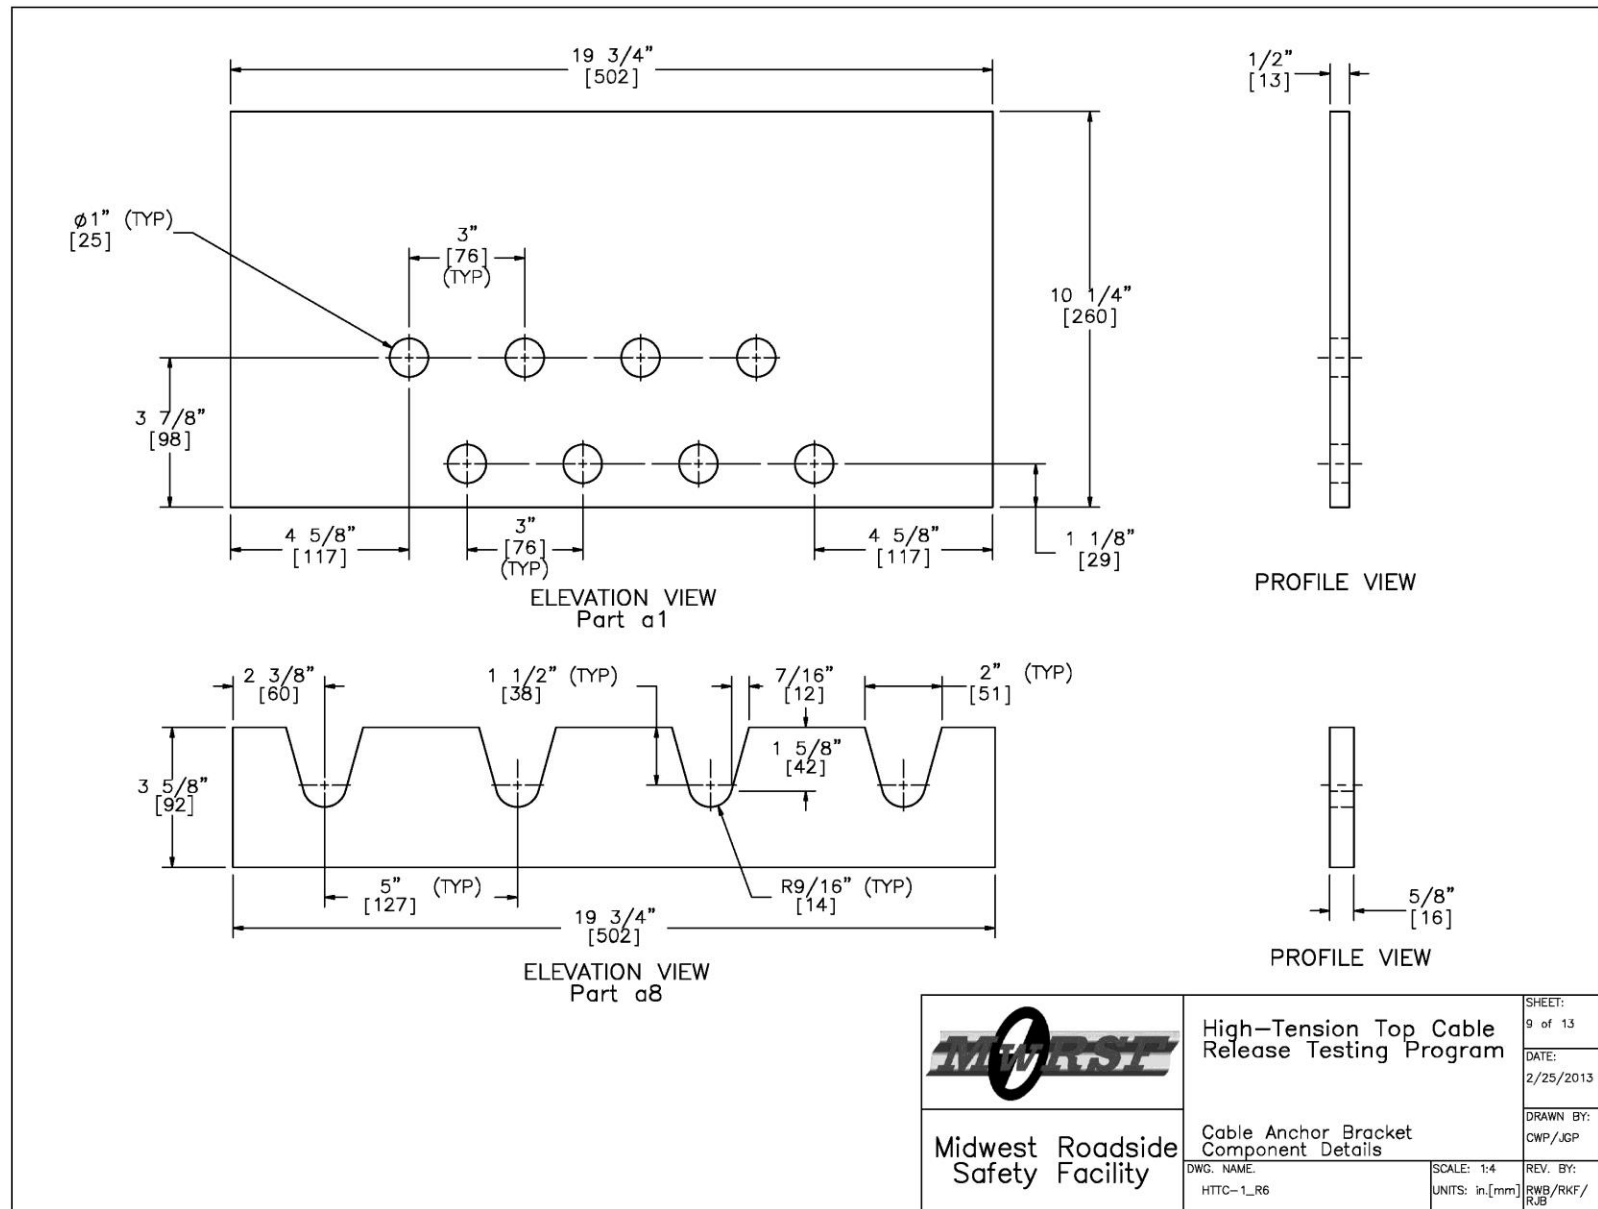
Cable Anchor Bracket Component Details, Test No. HTTC-1
